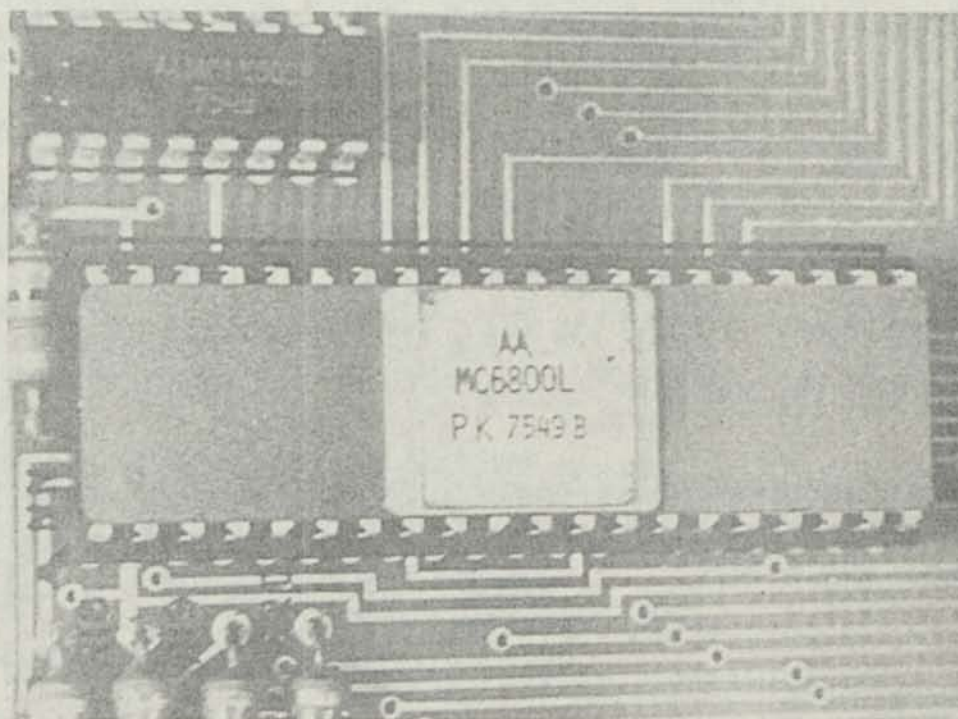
The Motorola MC6800 microprocessor shown mounted on a circuit board.
